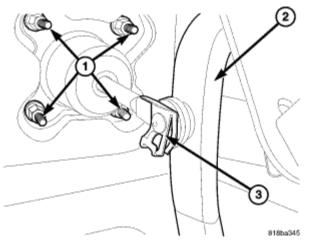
Identifying Retainer Clip, Pedal & Booster Mounting Nuts Courtesy of CHRYSLER LLC
